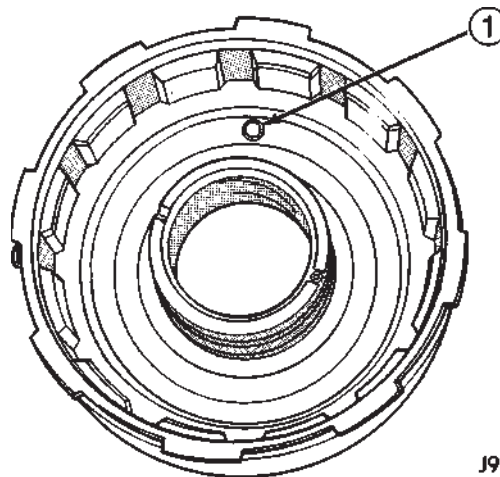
Front Clutch Piston Retainer Check Ball Location
